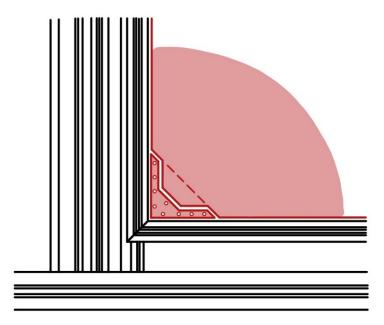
Example of corner reinforcement in the inner frame, with examples of a corner cutout.
